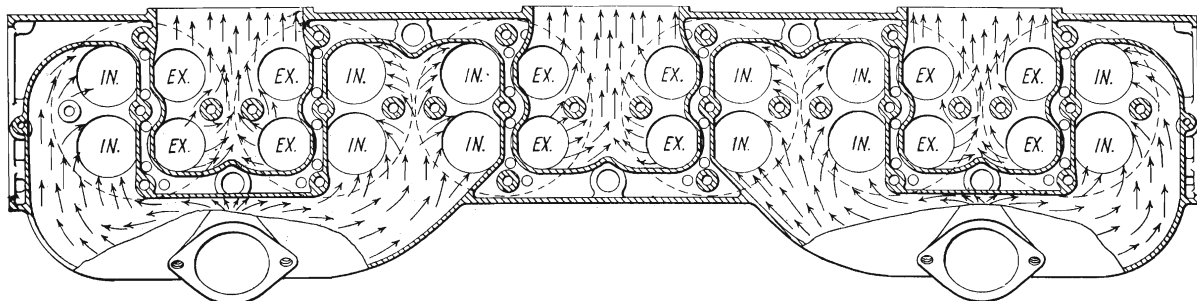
CROSS-SECTION OF VALVE-HOUSING, SHOWING INTAKE, EXHAUST AND WATER PASSAGES. The Large and Free Passages Are Obtained by Siamesing the Four Valves into One Port
